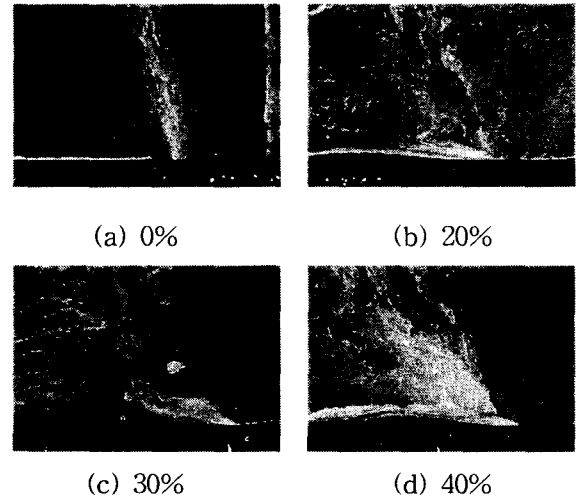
SEM fractograph showing fracture surface of side groove depth
